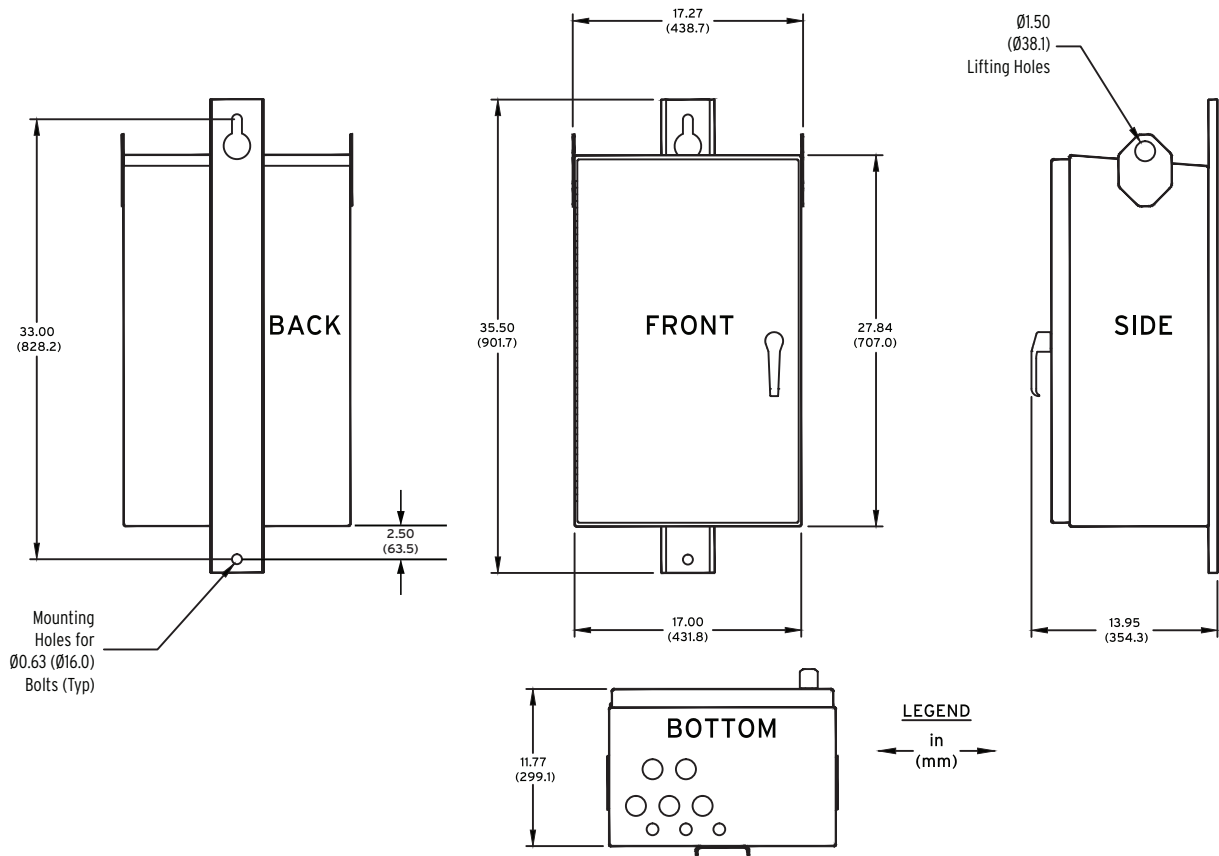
SEL-651RA Dimensions and Mounting Drill Plan
